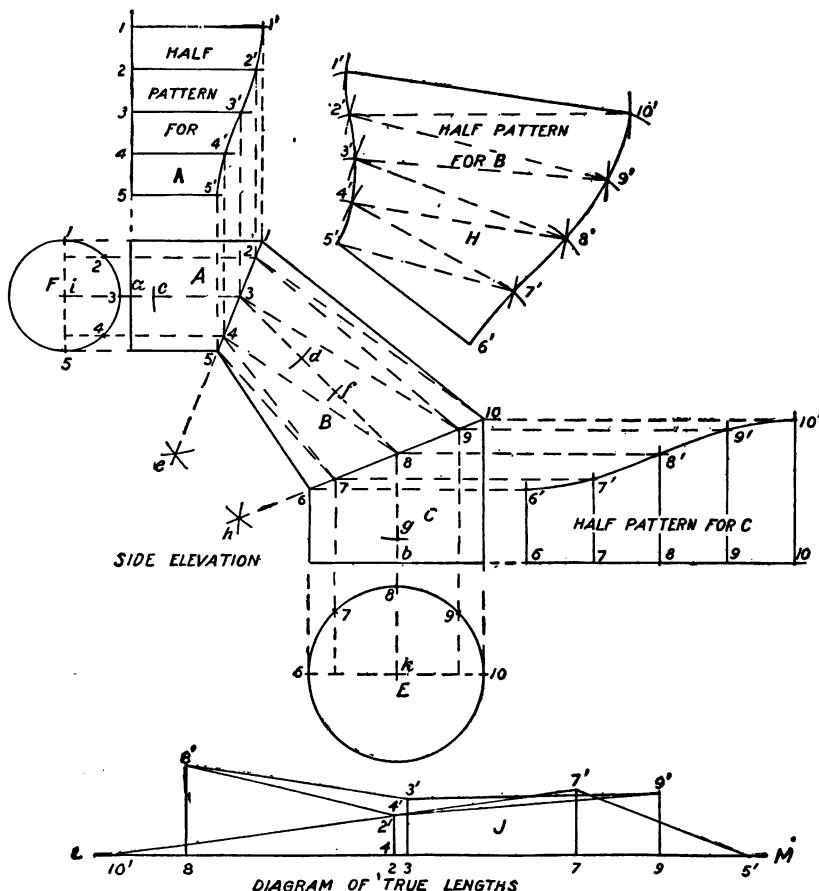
Developing the Patterns for a Pieced Reducing Elbow.
